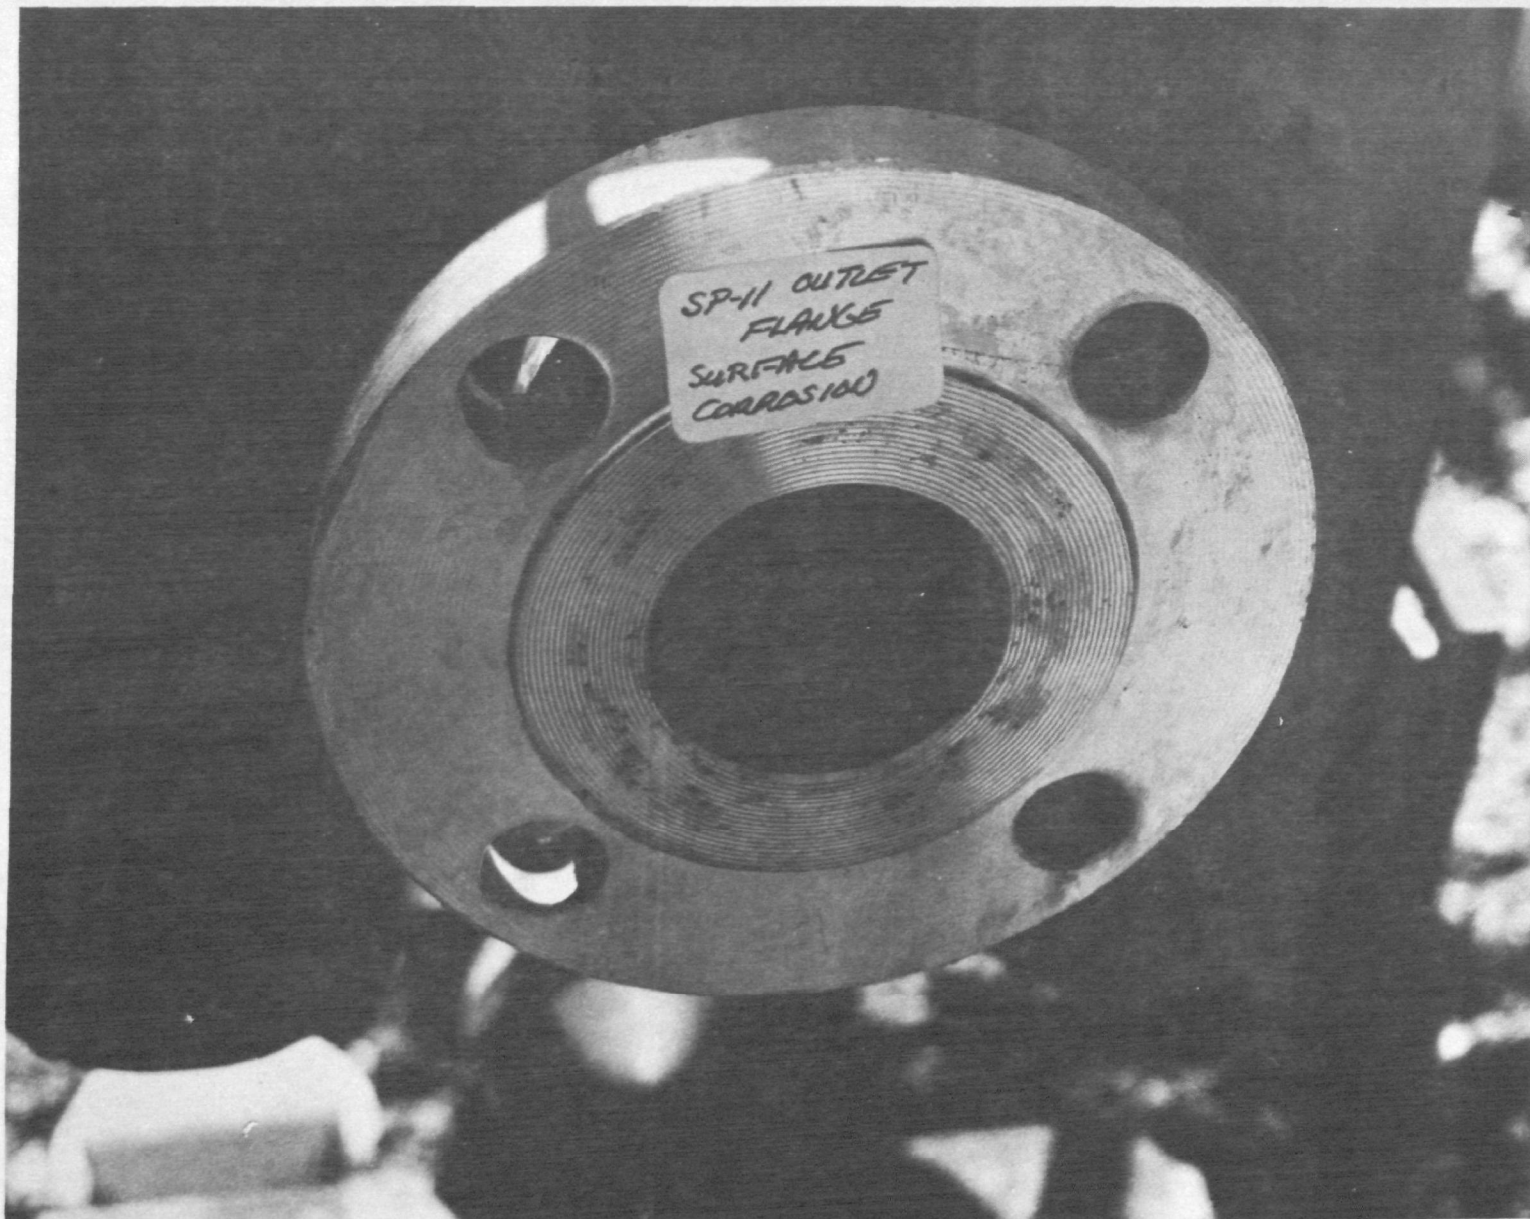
Flange Face on Basket Strainer SP-11 Outlet Port.
